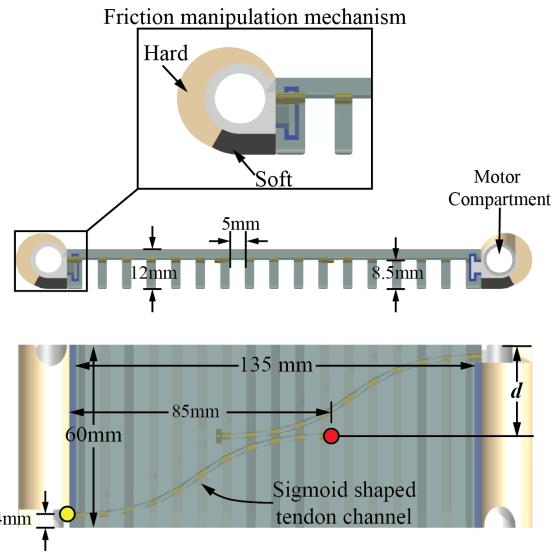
SOFT ROBOT DESIGN, DIMENSIONS AND PRIMARY COMPONENTS. THE $135\text{MM} \times 60\text{MM}$ RECTANGLE SHAPED SOFT BODY IS ATTACHED TO FRICTION MANIPULATION MECHANISMS AT EACH END OF THE ROBOT. THE 8.5MM DEEP GROOVES IMPART ANISOTROPY TO THE OTHERWISE ISOTROPIC MATERIAL AND FACILITATE MORE DEFORMATION ABOUT THE LENGTH OF THE ROBOT AS COMPARED TO THE WIDTH. THE FRICTION MANIPULATION MECHANISM INCLUDES A COMPARTMENT TO HOLD THE MOTOR OF THE MOTOR-TENDON ACTUATOR. THE SIGMOID SHAPED TENDON CHANNELS START AT ONE EDGE AT 4MM DISTANCE FROM THE EDGE (YELLOW CIRCLE). THE CHANNELS TERMINATE AT 85MM ALONG THE LENGTH AND $d\text{MM}$ FROM THE OPPOSITE EDGE (RED CIRCLE).
